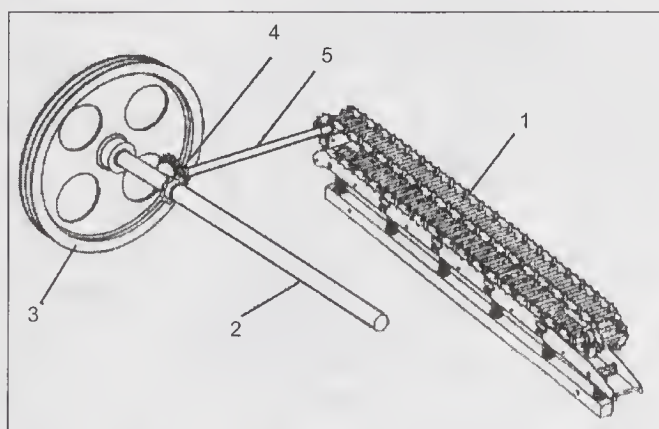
Crop bundles feeder chain used on the thresher. 1, Conveyor chain; 2, Shaft; 3, Drive pulley; 4, Bevel gear drive; 5, Shaft.
